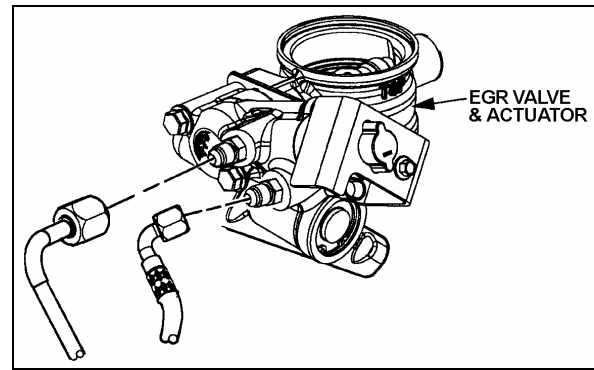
EGR VALVE & ACTUATOR ASSEMBLY 01148
